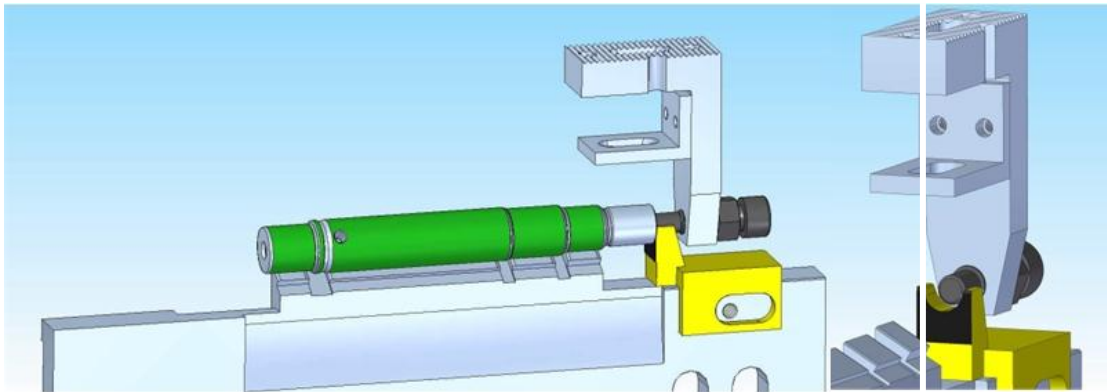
Example of jaw in loading position and workpiece stop (detail on the right)
